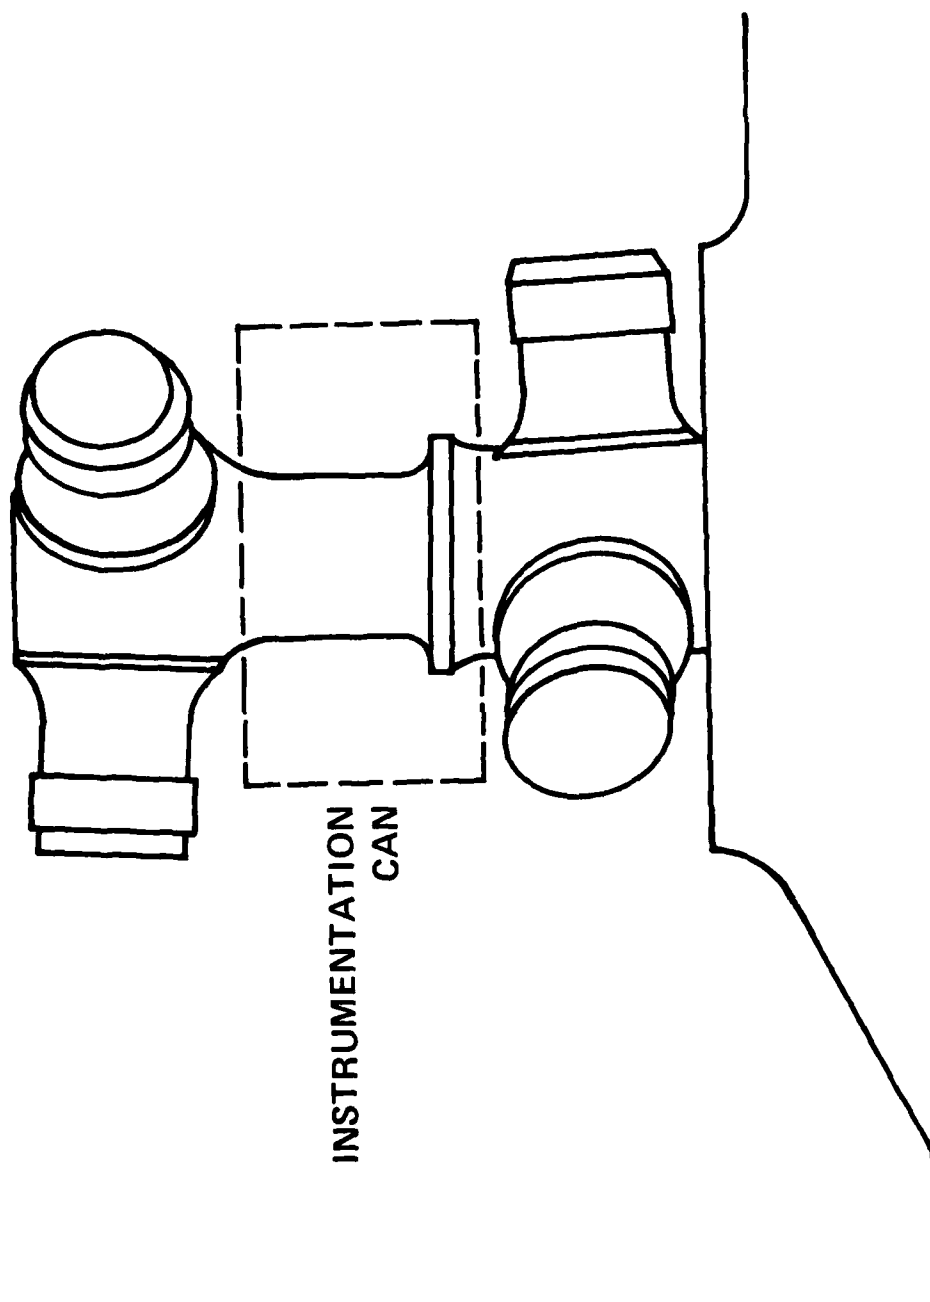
SKETCH OF ROTOR HUB AND INSTRUMENTATION CAN
